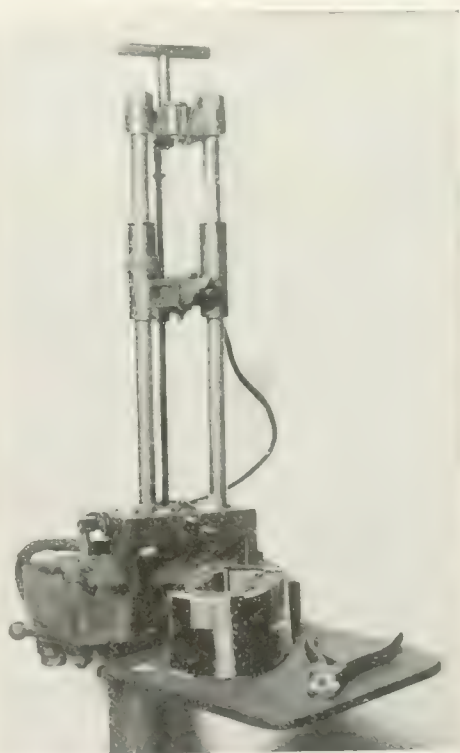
GRAVITATIONAL TYPE WELDING TOOL
